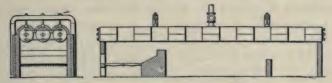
BATTERY OF PLAIN CYLINDER BOILERS.
